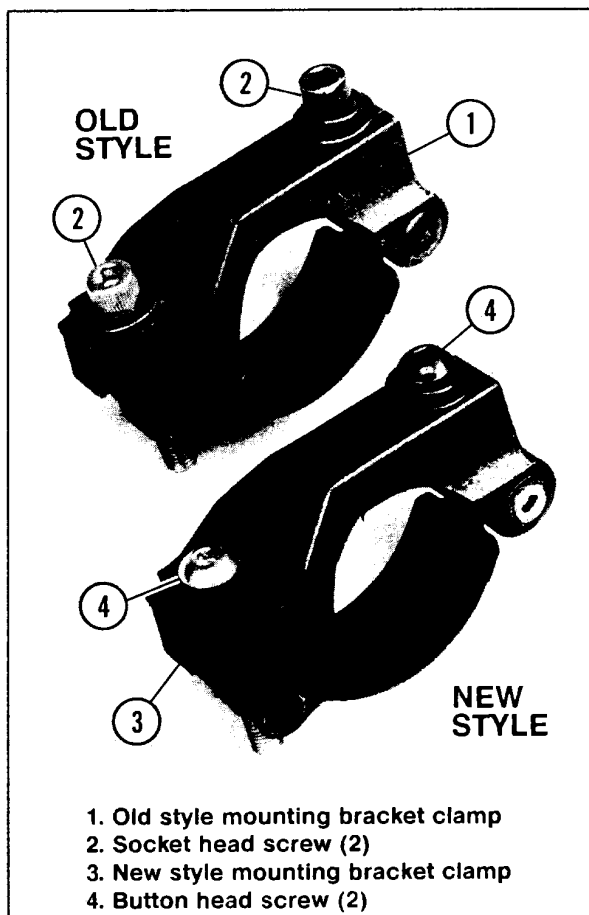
Convertible Windshield Mounting Bracket Clamps - Old Style (from Kit 91849-85A) and New Style (from Kit 91849-85B)
